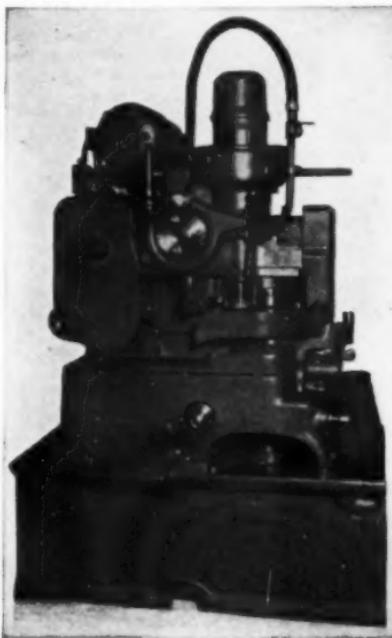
(above) Front view of Felt No. 7-A high speed gear shaper.
